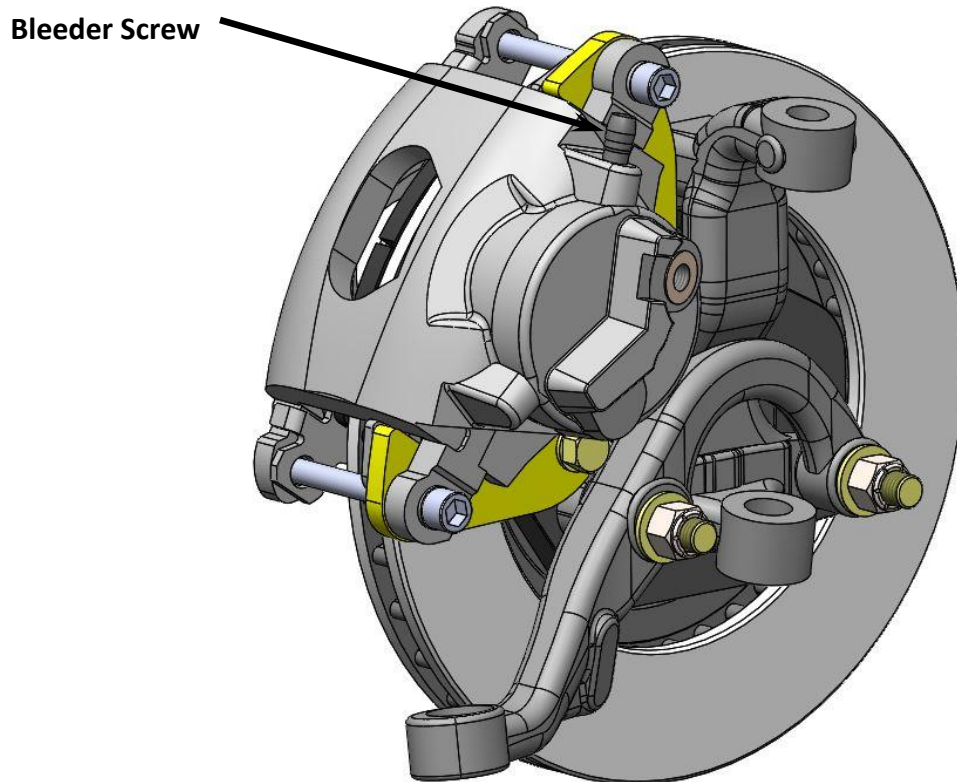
Caliper Installed (Driver Side F-Body Spindle Steer Arm Shown Above)
